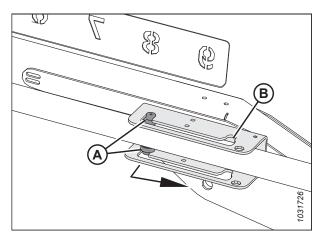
Outer Left Arm Cylinder – Forward Position
